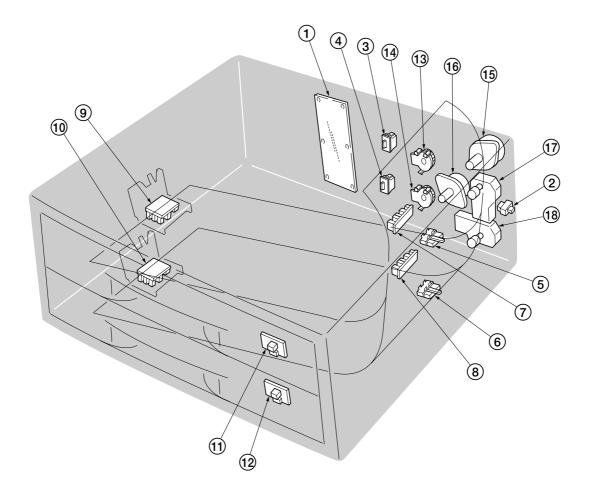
Electrical components layout (500-sheet paper feeder)
